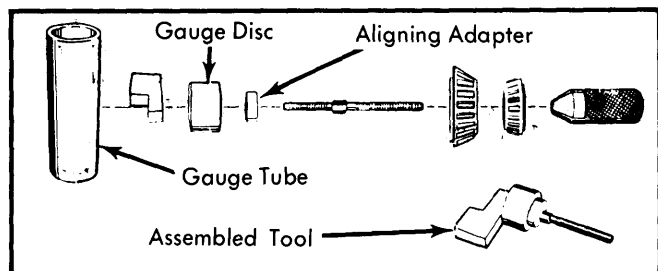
Rear Axle Pinion Depth Gauge Tool Set
